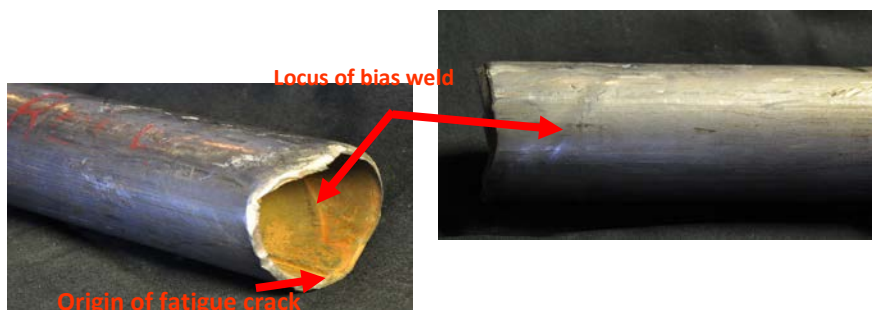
Fatigue Break at a Factory Skelp-end Weld
